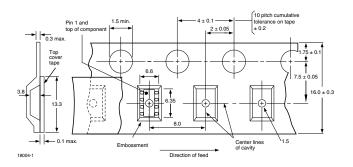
Tape Dimensions, 2000 Parts per Reel
